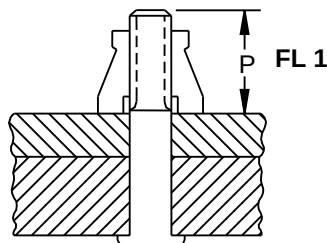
HEX DRIVE BOLT PIN PROTRUSION
